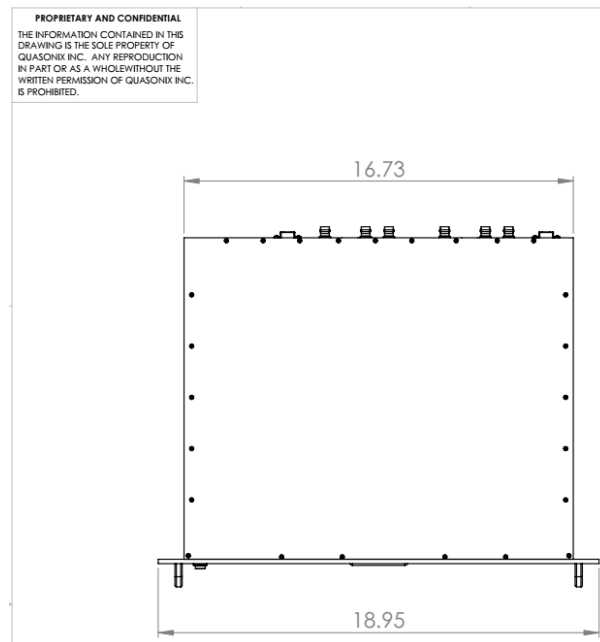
Mechanical Drawing – 1U Top View - EVTm 1U Rack Mount Encoder/Decoder
